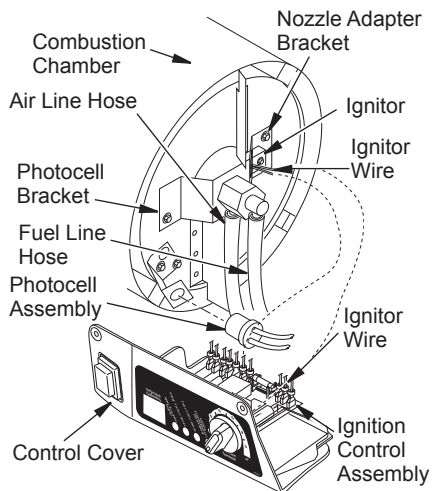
Disconnecting Ignitor Wires from Ignition Control Assembly (170T Model Shown)
